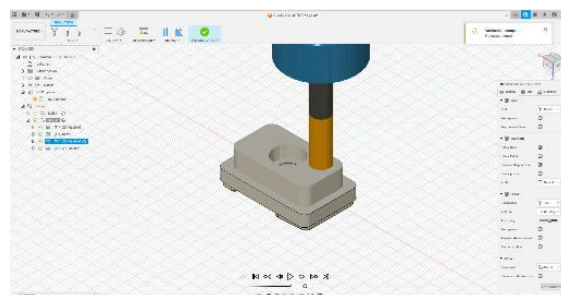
Simulation view on fusion 360 setup 2 with flat end mill 8 mm
